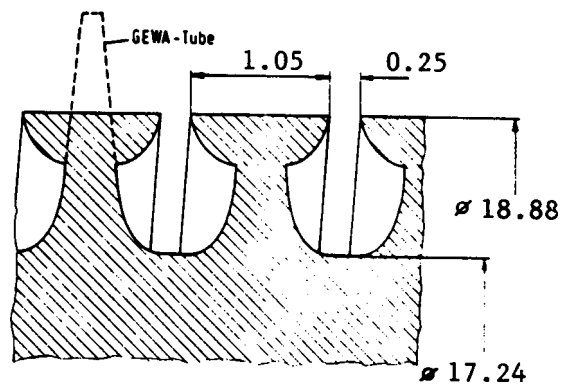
Cross section of the Gewa-T B1 cut axially
